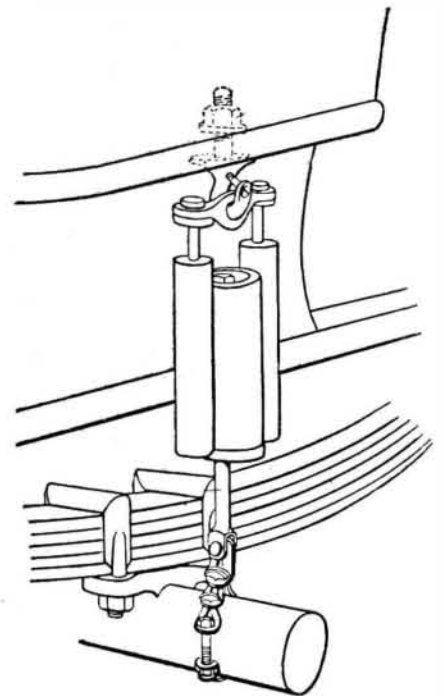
The Baldwin Combined Spring and Friction Recoil Check.
